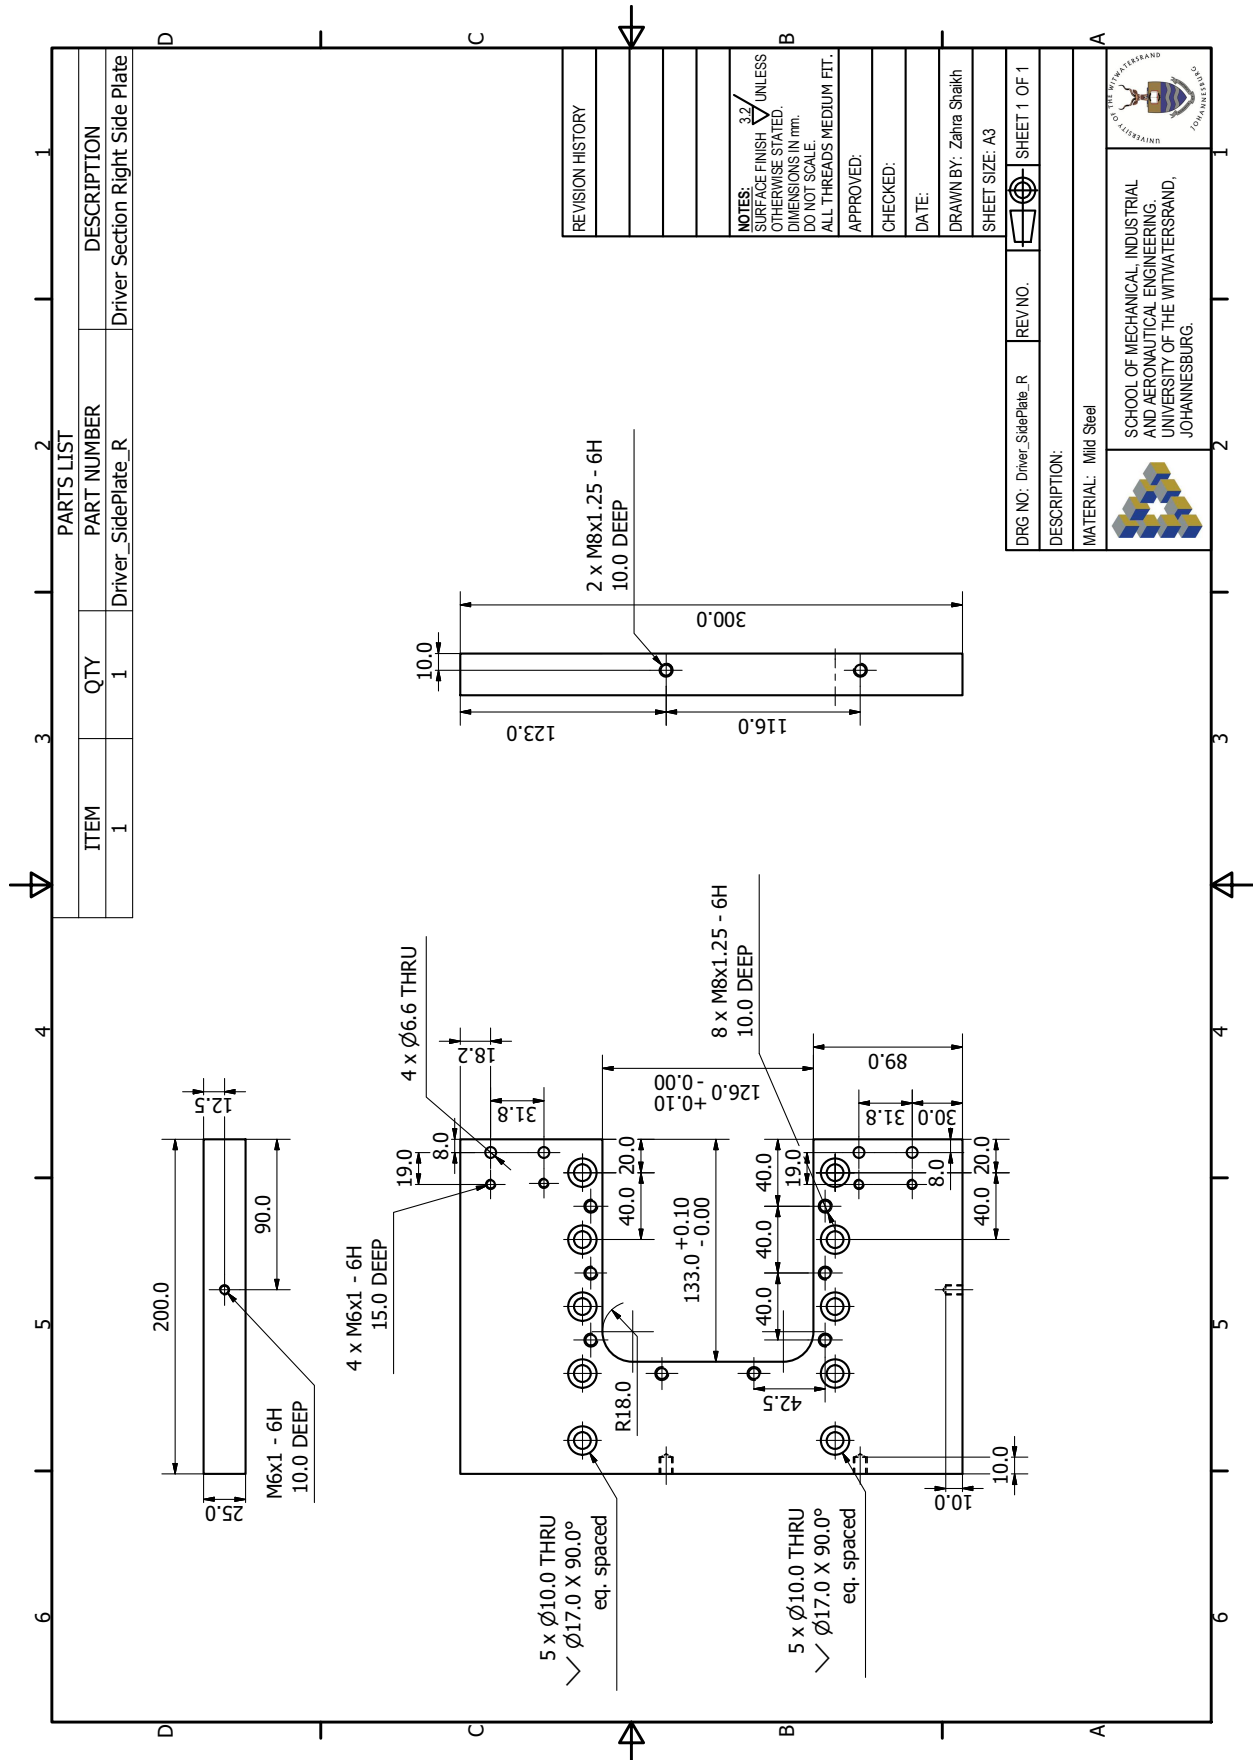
Driver Side Plate (Right). Identical dimensions for left side
